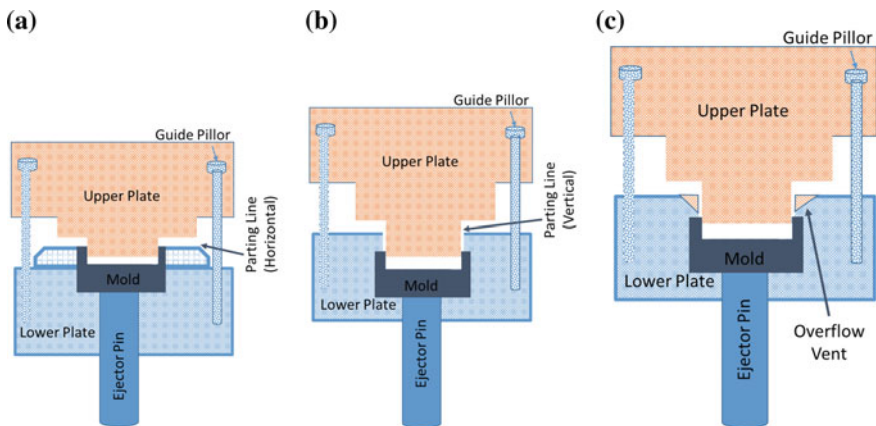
Types of mold a flash type mold, b positive type of mold and c semi positive type mold
